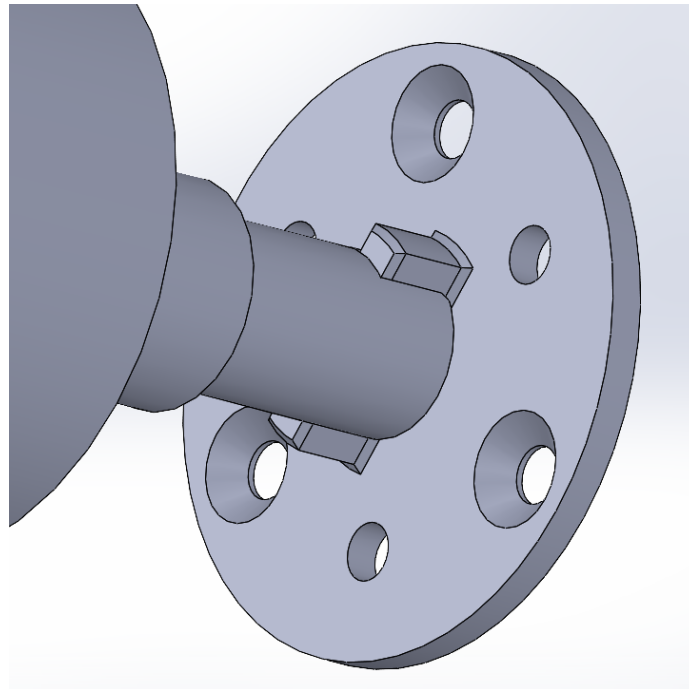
CAD model of the connection between the worm shaft and motor.
